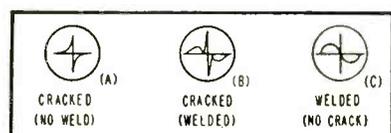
Typical patterns for (A) cracked, (B) cracked and welded, (C) welded metal
